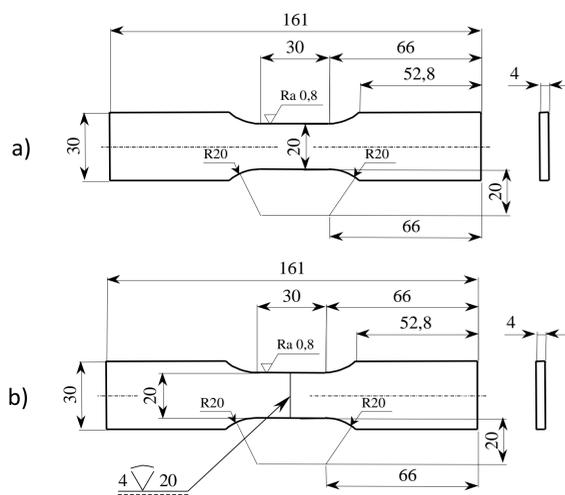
Geometric features of the sample for testing under static loads: a - AW-5754 aluminum alloy sheets, b - AW-5754 aluminum alloy welded sheets
